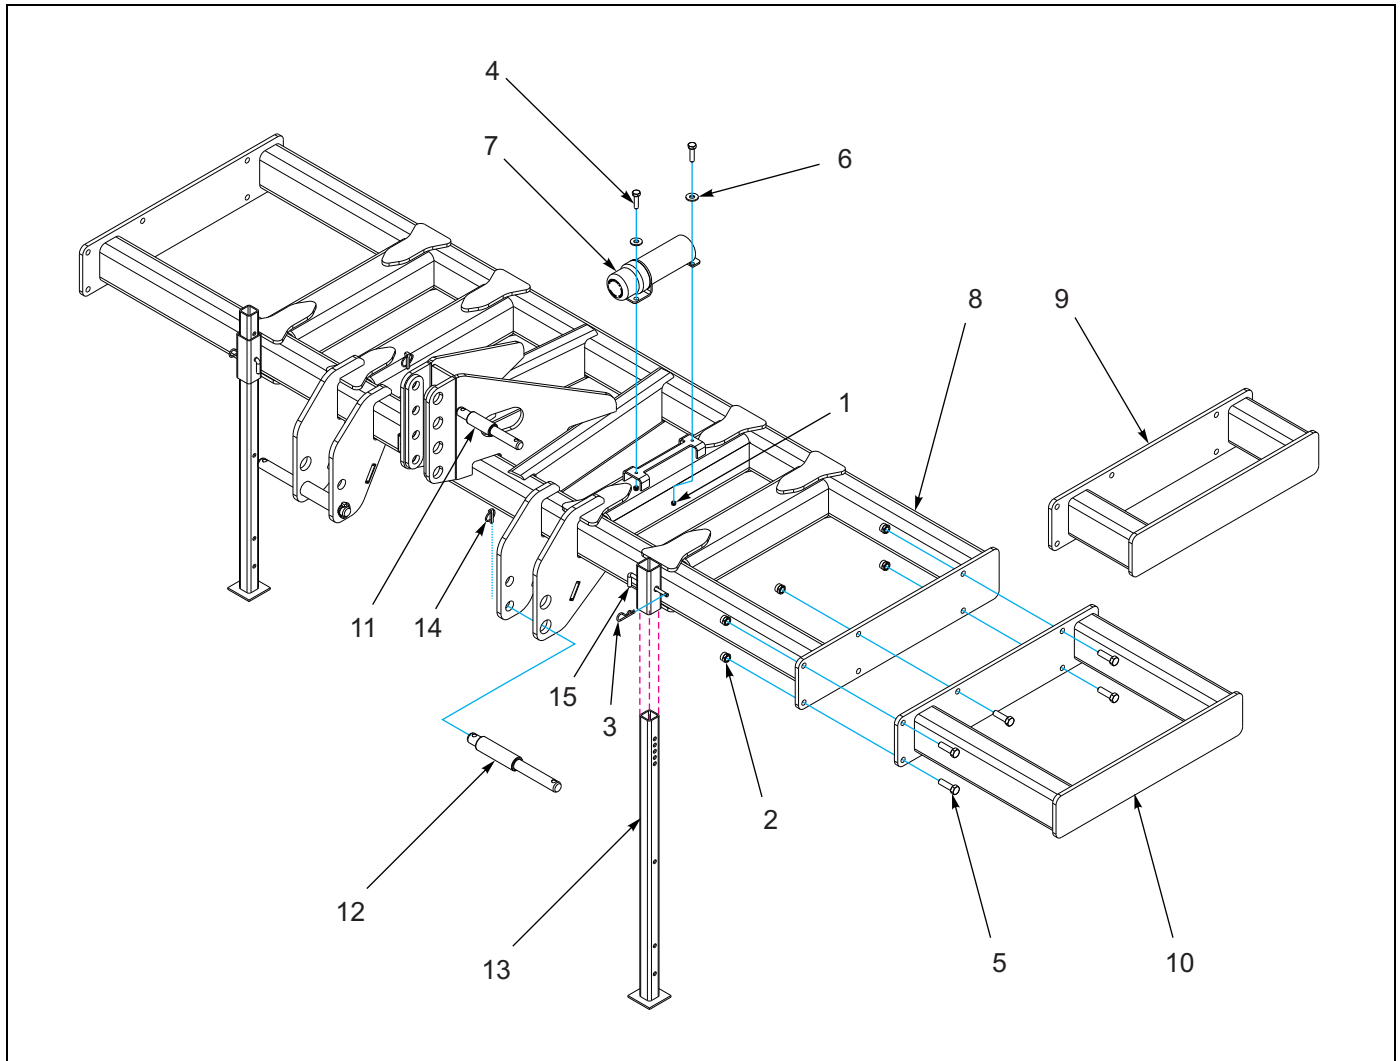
Standard Frame Assembly - 4, 5 6, & 7 Shank
